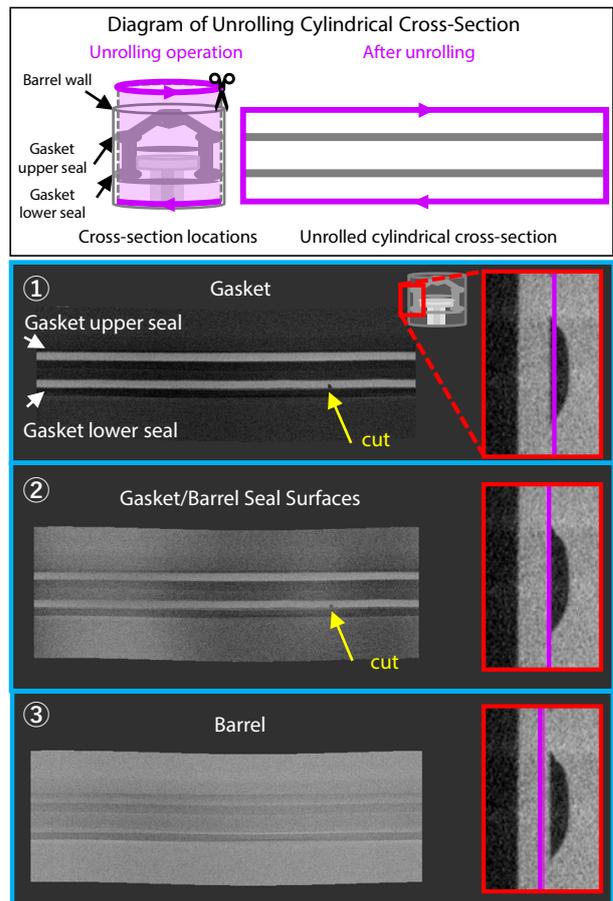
Unrolled Cylindrical Cross-Section Images of Gasket and Barrel
